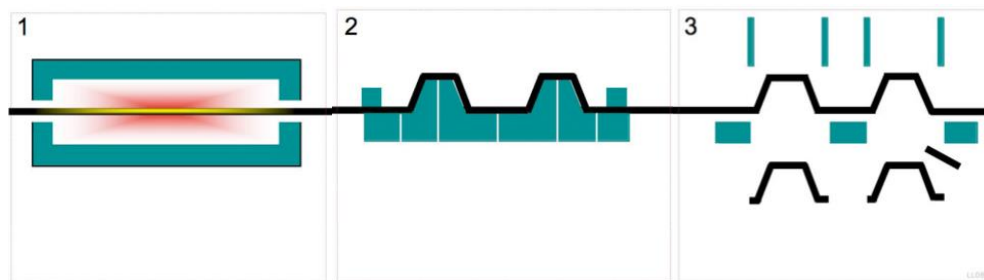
Thermoforming process (1: heating; 2: forming; 3: trimming) (6)
